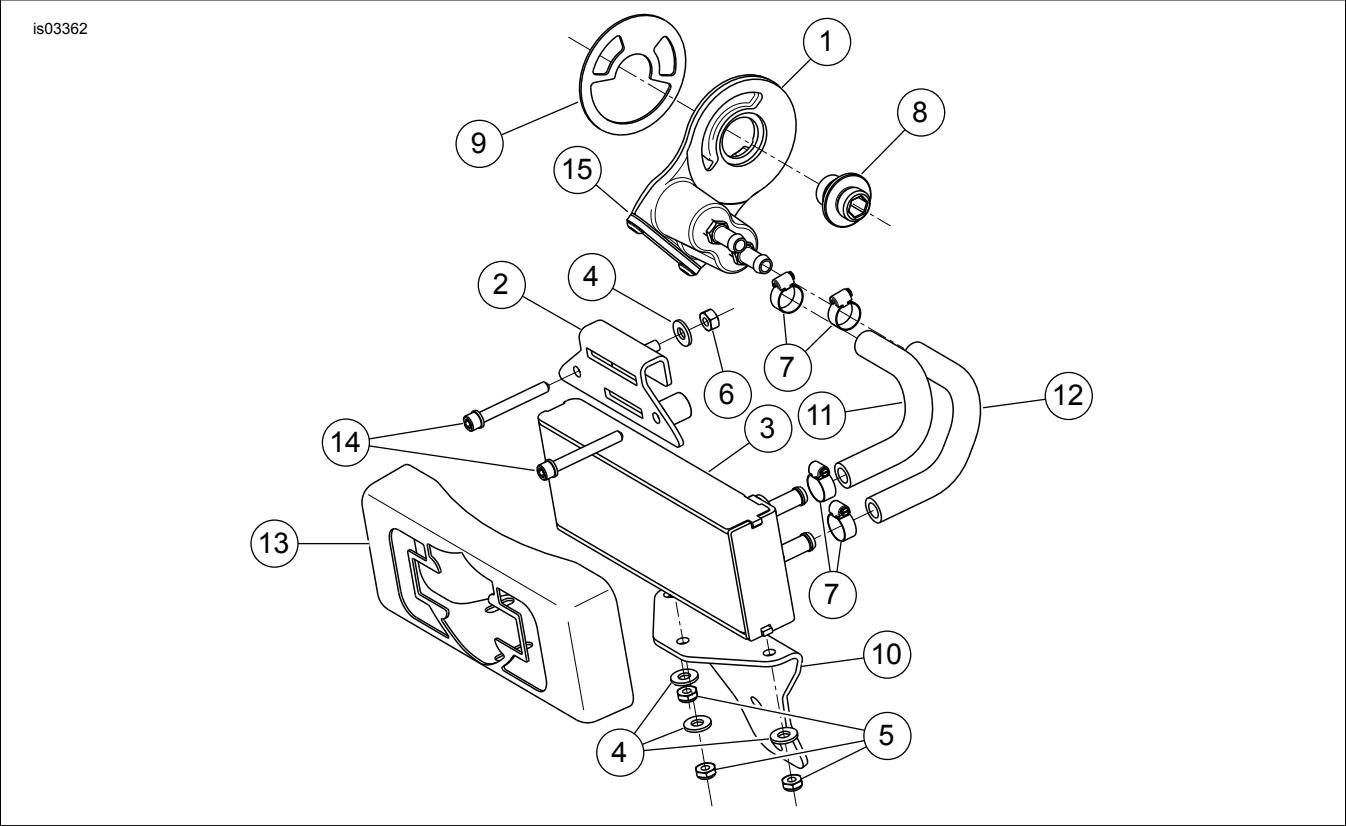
Service Parts for Dyna Oil Cooler Kit and Chrome Oil Cooler Cover
